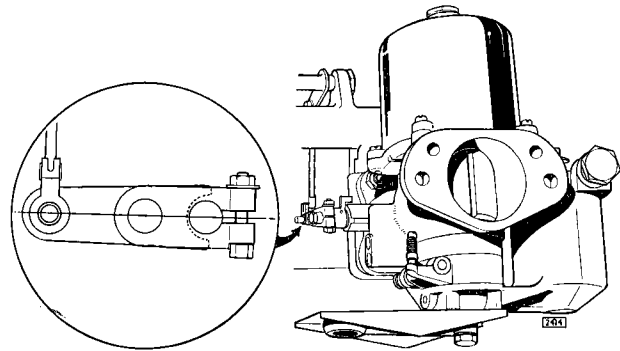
Two piece throttle lever. Inset shows it in the midway position
